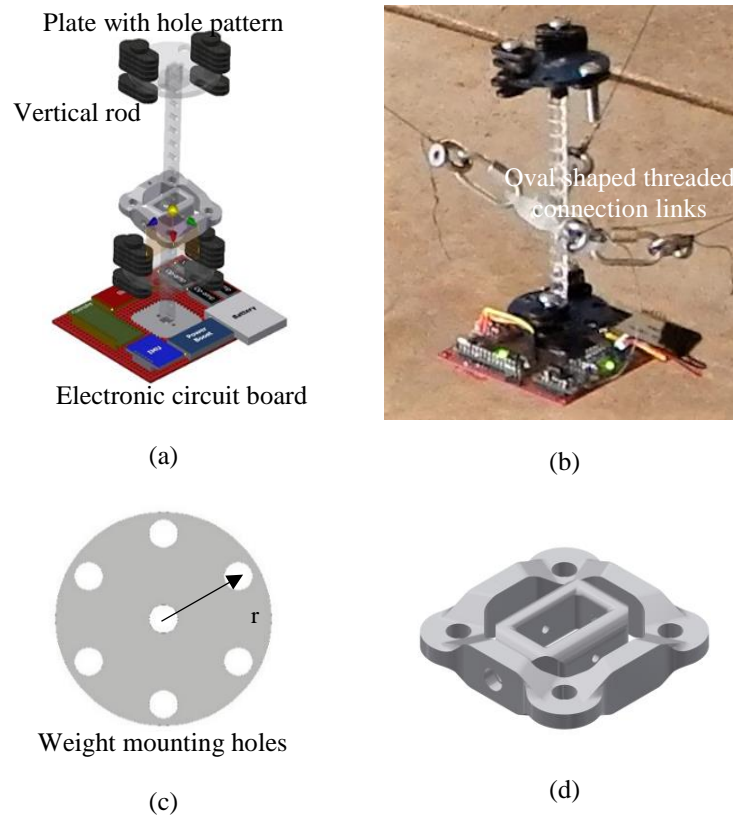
a) CAD model of the CMBS; b) Assembled CMBS c) Circular plate for weight mounting; d) gimbal system
